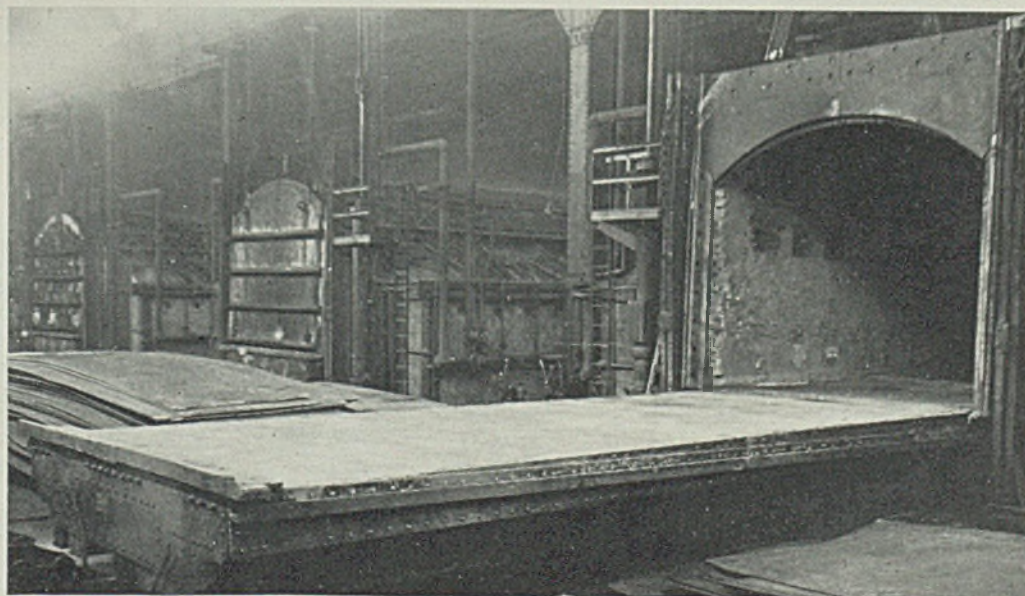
shows a heat treating furnace door about 14 feet square lined with refractory concrete 8 inches thick. The concrete mix was 1 bag of cement to 4 cubic feet of crushed insulating fire brick grog. The door was placed in service in September,
